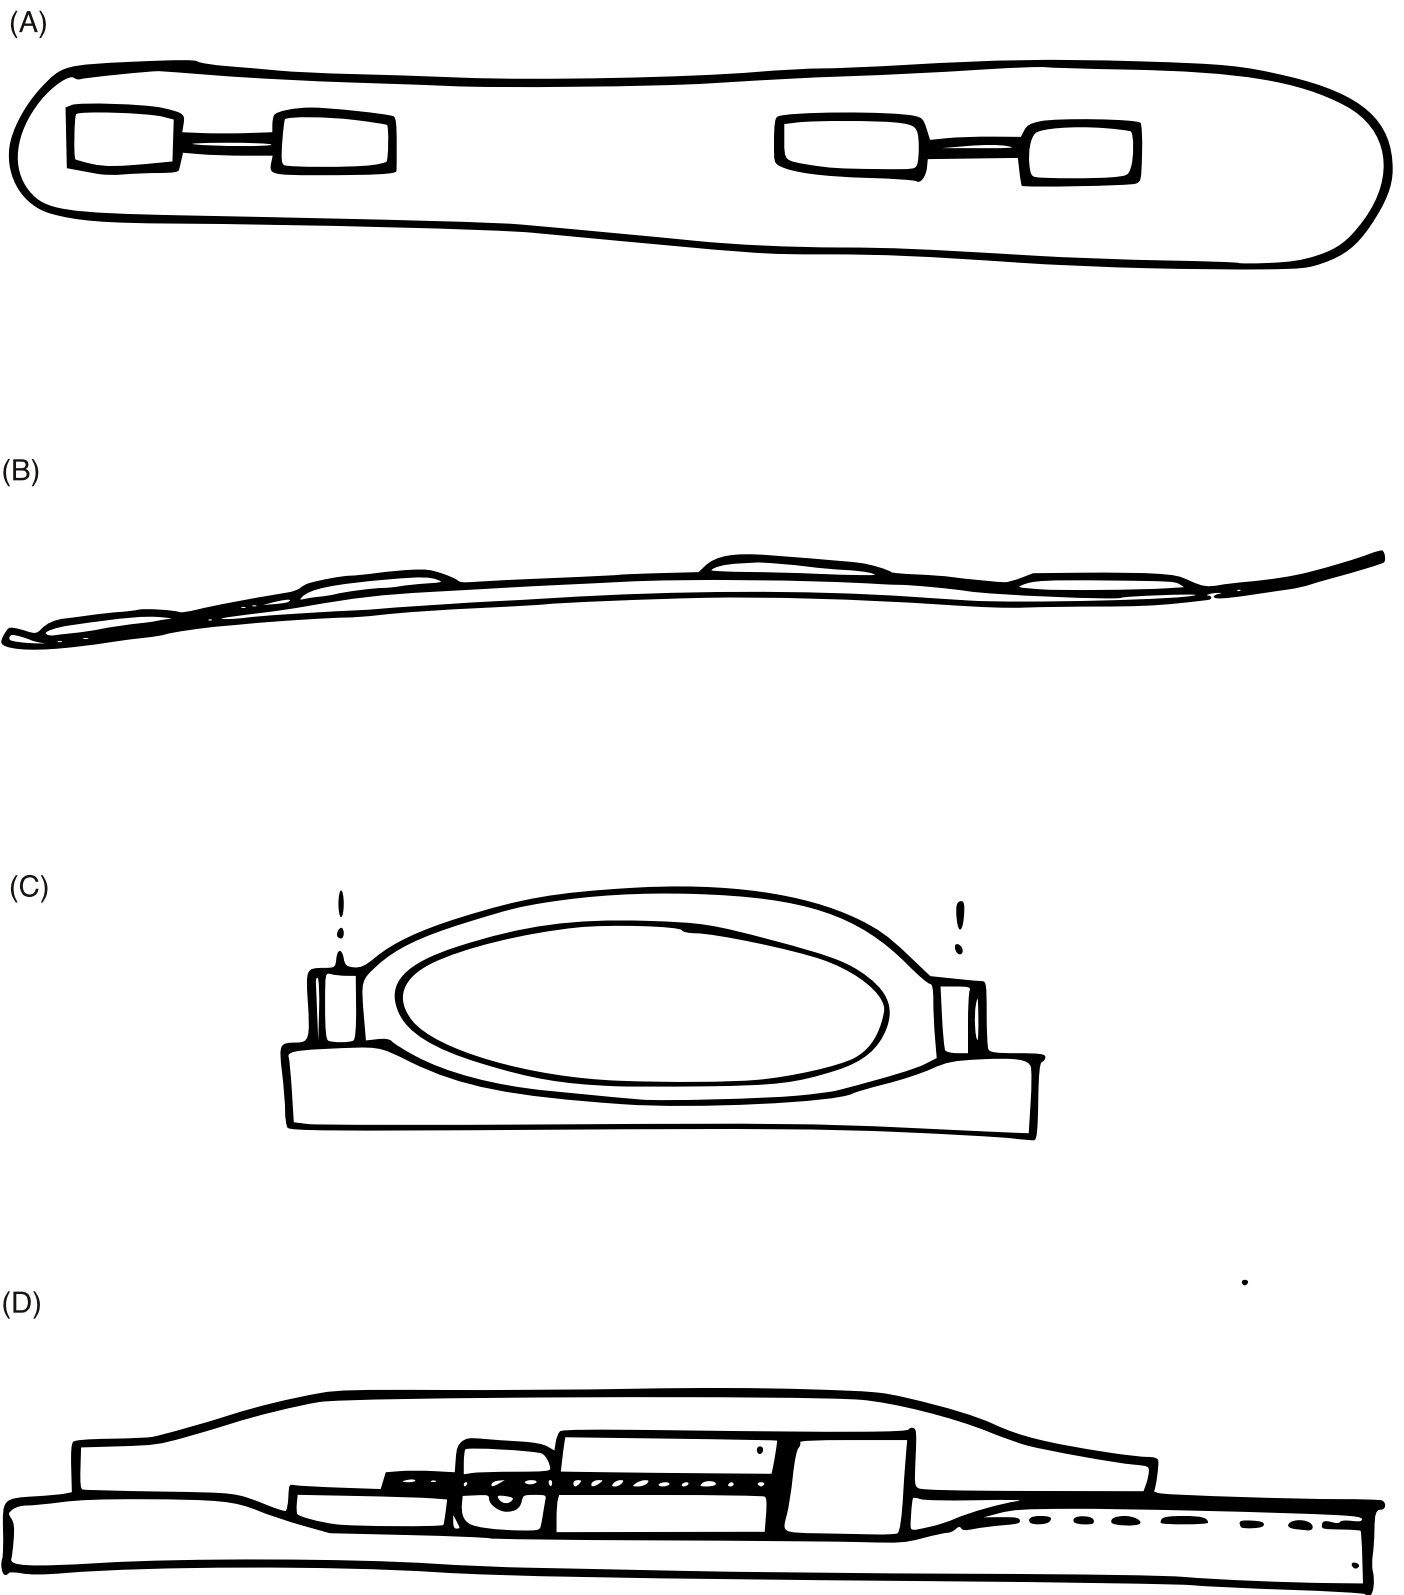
Sketch of conceptual ski. (A) Top view, (B) Side view, (C) Cross-section of piston house, front view, and (D) Cross-section of piston house, side view.
